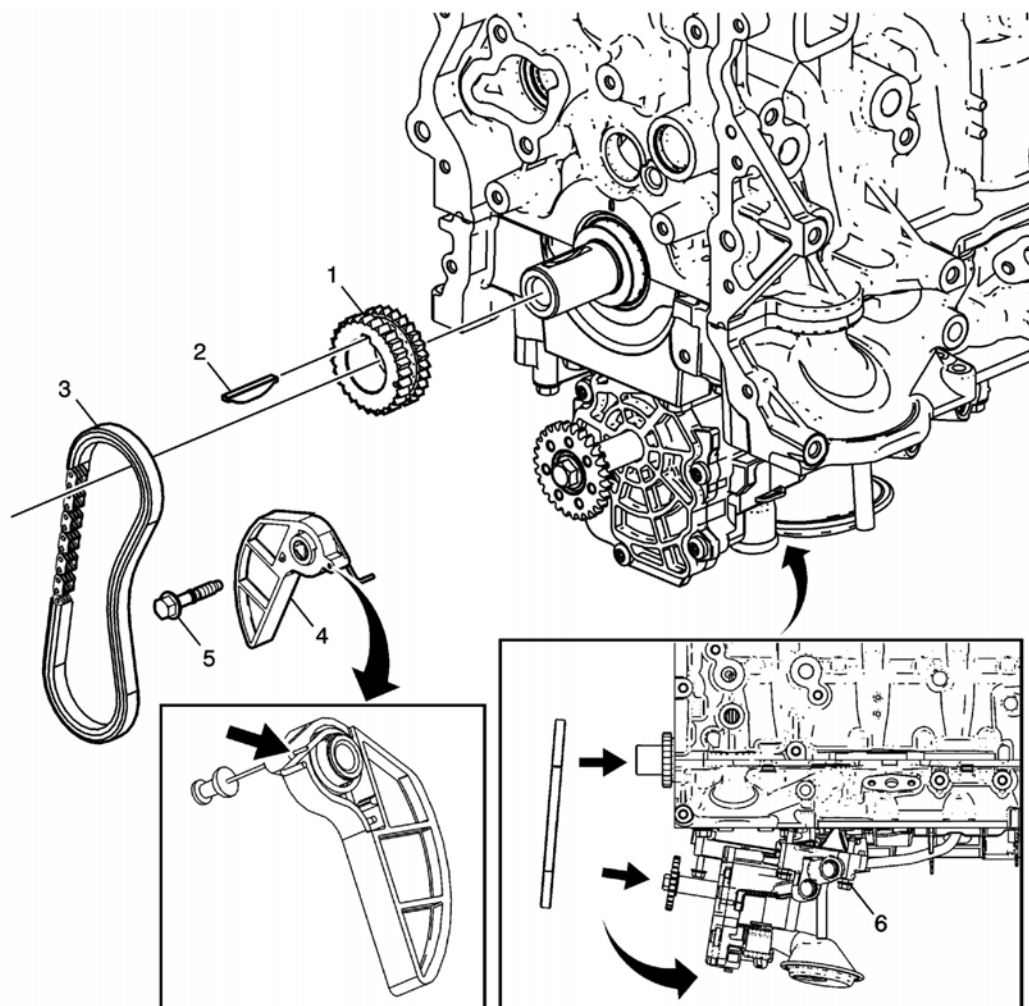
Crankshaft Sprocket and Oil Pump Drive Chain
